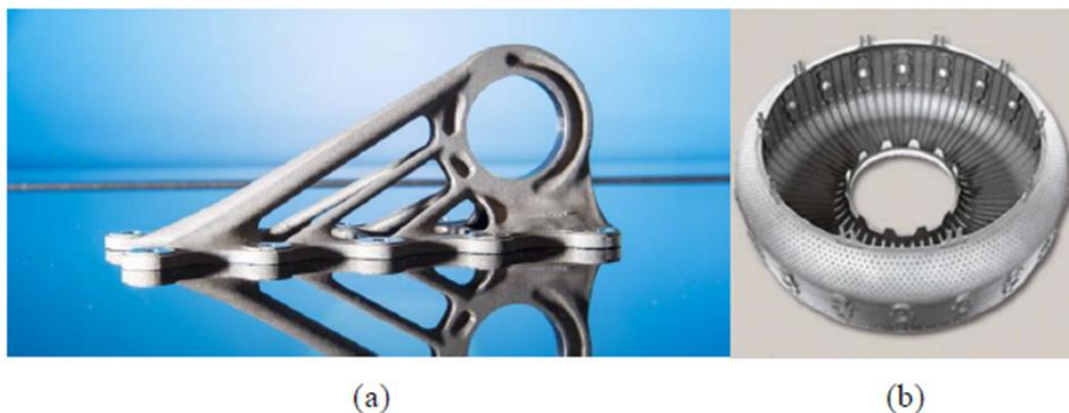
Aerospace elements manufactured by AM technology: (a) The flight crew rest compartment bracket [17], and (b) Engine housing produced by SLM [29].
